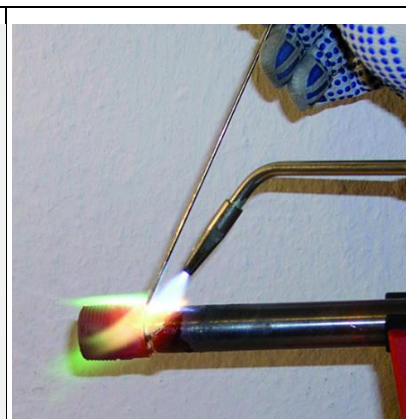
Brazing of brass adapter to copper piping (Source: HEAT GmbH)
